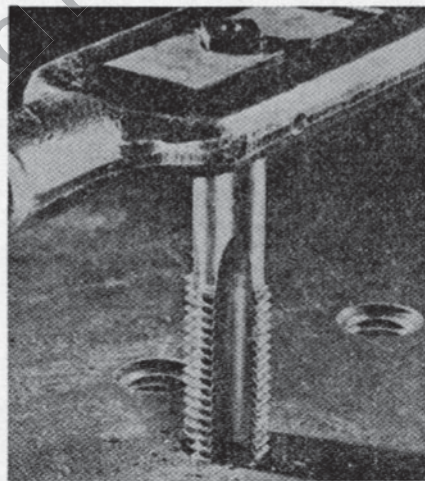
Special drill taps are provided in thread repair kit for threading drilled hole to correct size for outside of thread insert. A standard tap cannot be used.
